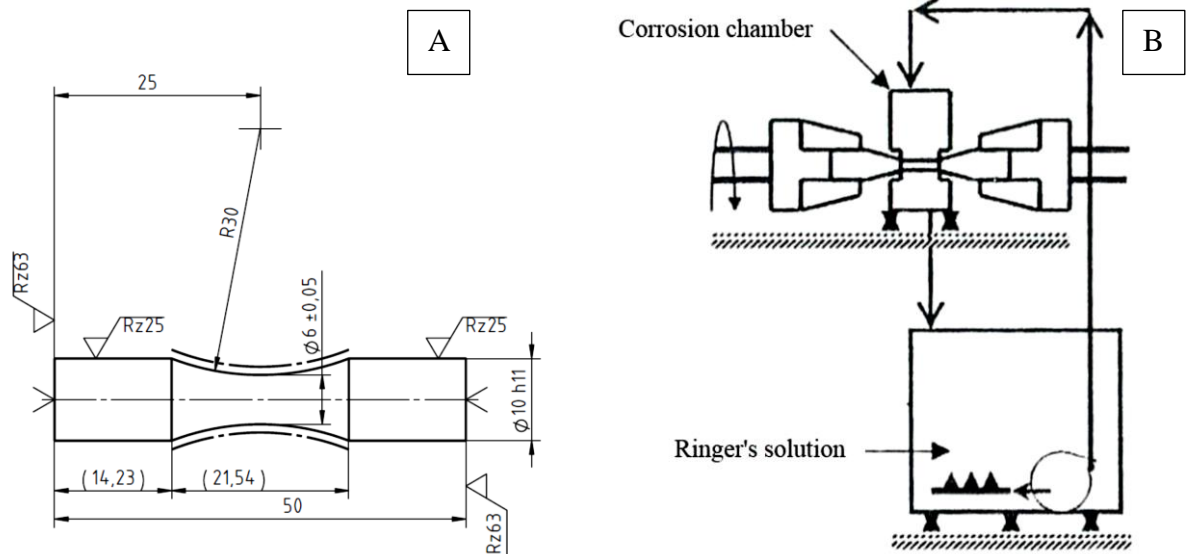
(A) The fatigue test specimen and (B) Corrosion fatigue cell
